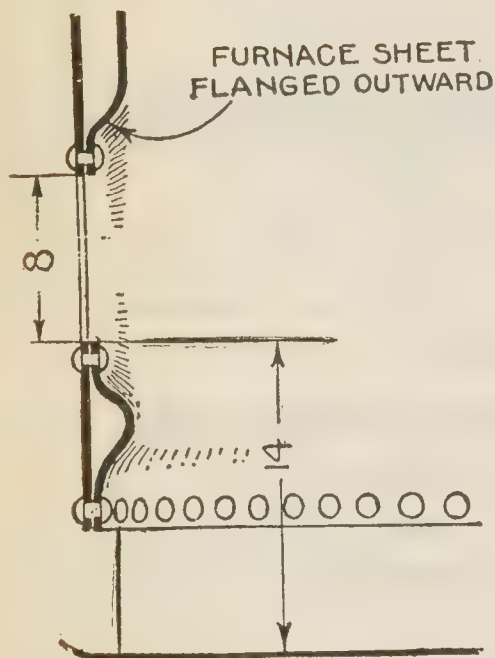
,738.—Detail of lower tube sheet showing diameter of surface available for tube layout. As shown, the shell diameter of 40 inches is reduced 2 inches each side by water leg and furnace sheet and an additional $1\frac{1}{2}$ in. must be allowed on each side for flanging leaving $40 - (2 \times 2 + 2 \times 1\frac{1}{2}) = 33$ ins. available in tube sheet section for tubes.
